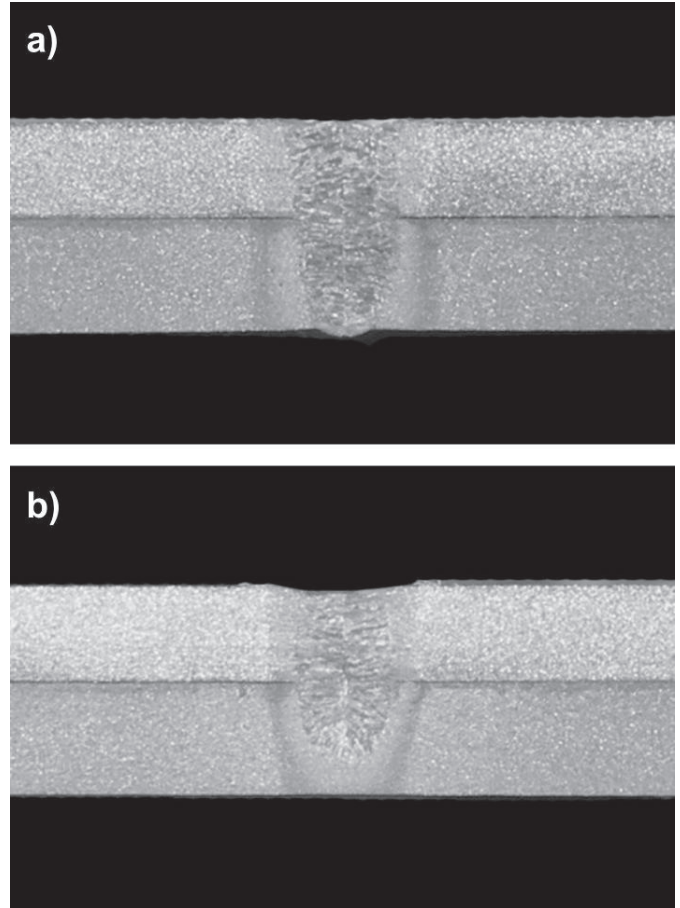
Macrostructure and the face of the weld in the overlap joint made using a laser beam focused on one spot: welding rate: 11 m/min (a) and 12 m/min (b)
